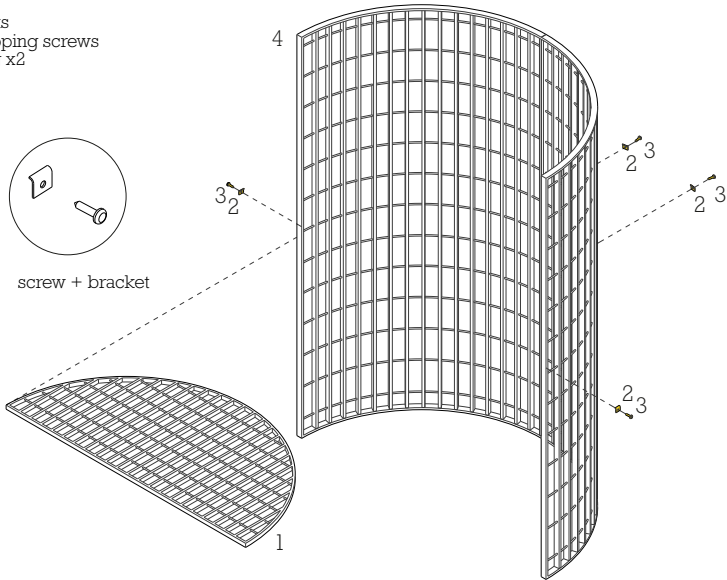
Construction detail - Main components of the exhibition modules | Axonometric exploded view.
